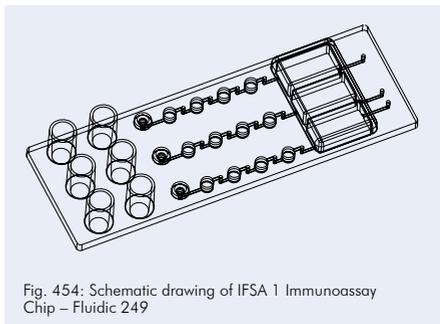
Schematic drawing of IFSA 1 Immunoassay Chip – Fluidic 249
